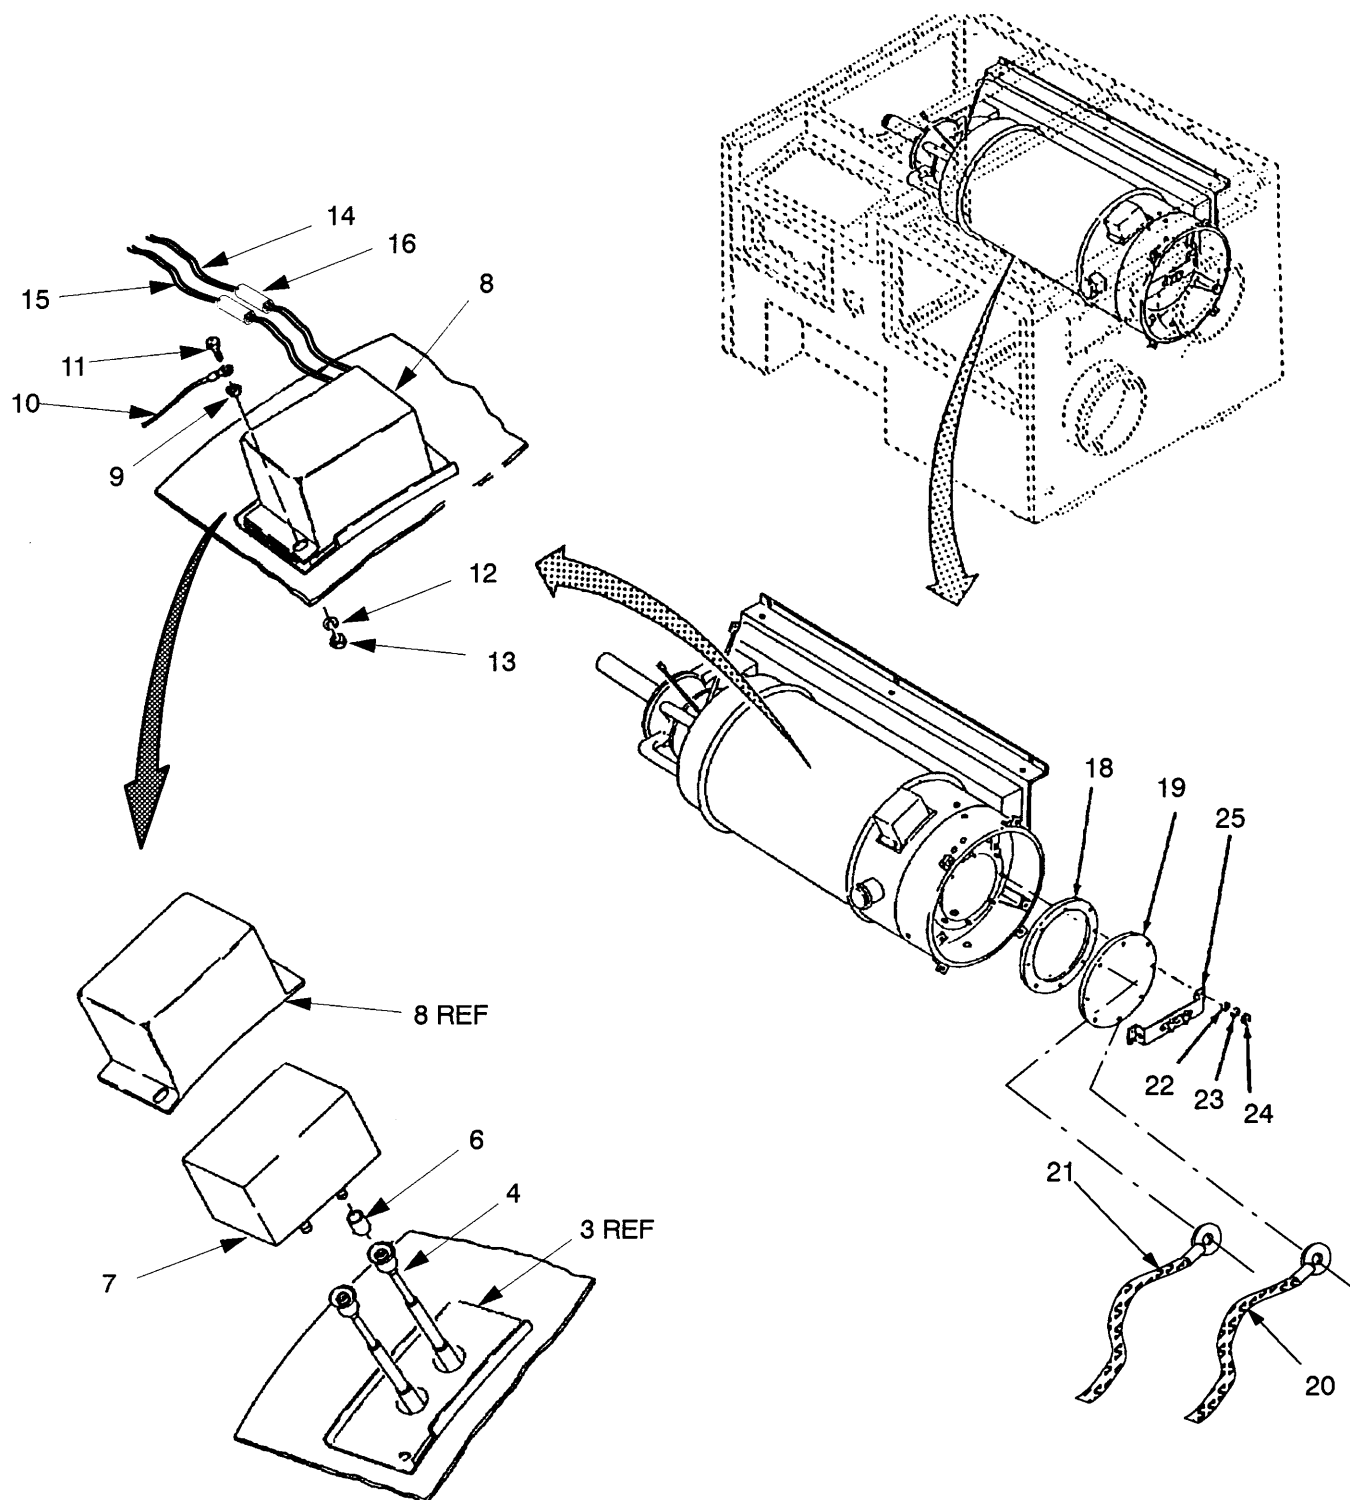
B. Transformer, (Model H120-1) Installation (Sheet 2 of 2)
